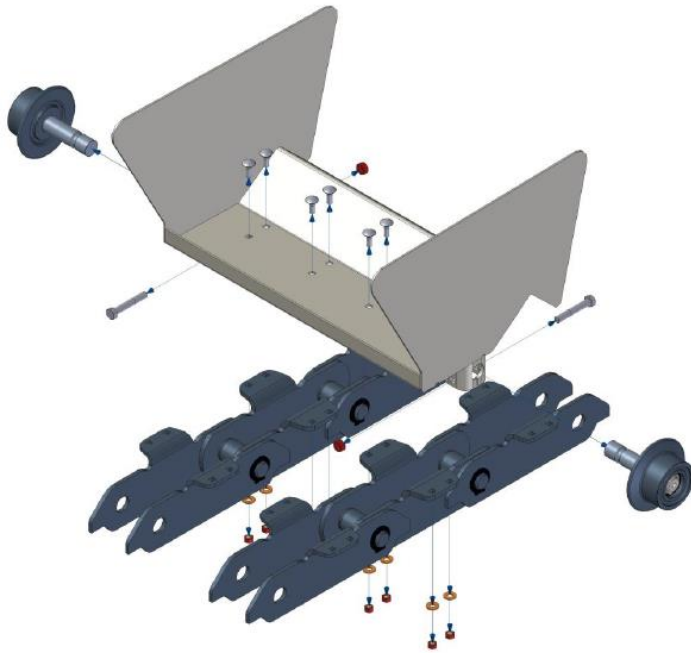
Explosion view of an apron conveyor (www.beumer.at)
